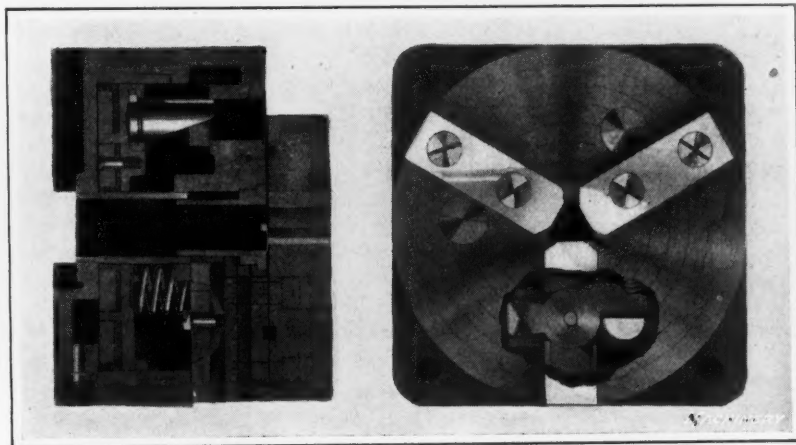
Design of Pneumatic Chuck for Application on Drilling Machines
